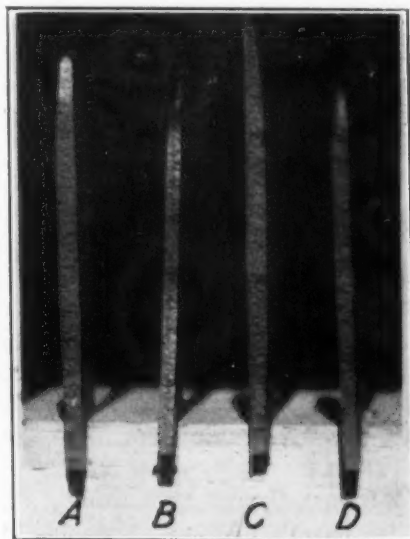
Photograph Showing Nickel Clearing Thin Sections of Mottled Spots or Chilled Fin.
